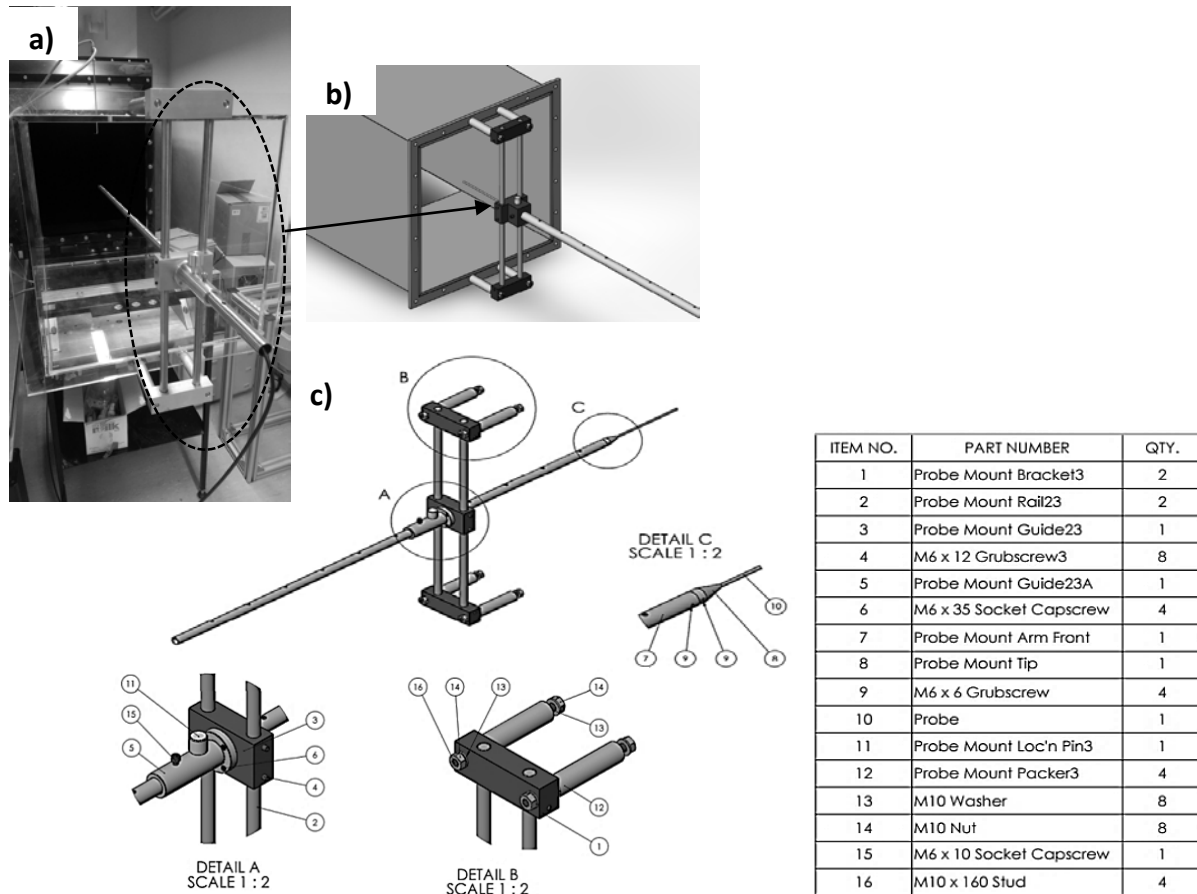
a- Wind tunnel with empty test section, b- Hot wire anemometer probe traversing design c- Hot wire probe support parts design.
